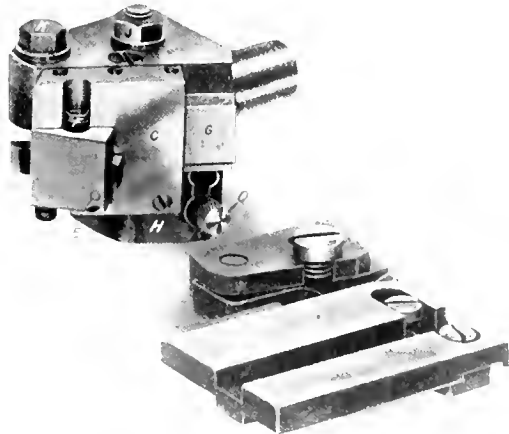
Cone Point Turning and Cutting-off Tool for Pinion Blanks and Staffs, and the Pusher by which it is operated from the Cross Slide
